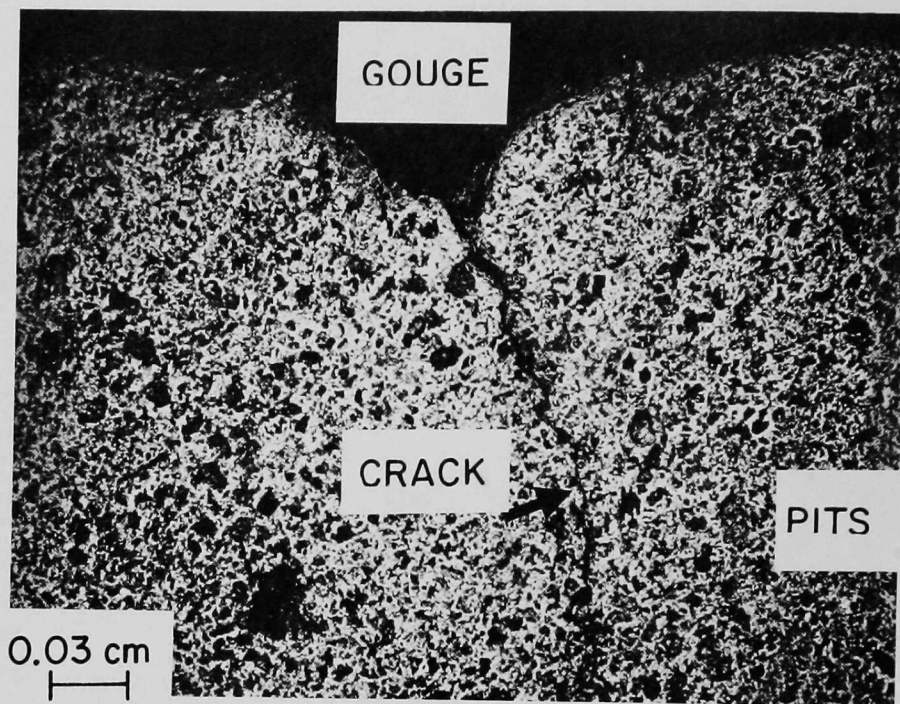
Top Surface of HYGAS Valve Assembly Leaf Spring, in the As-received Condition. A crack is emanating from a gouge. Neg. No. ANL-306-78-580
